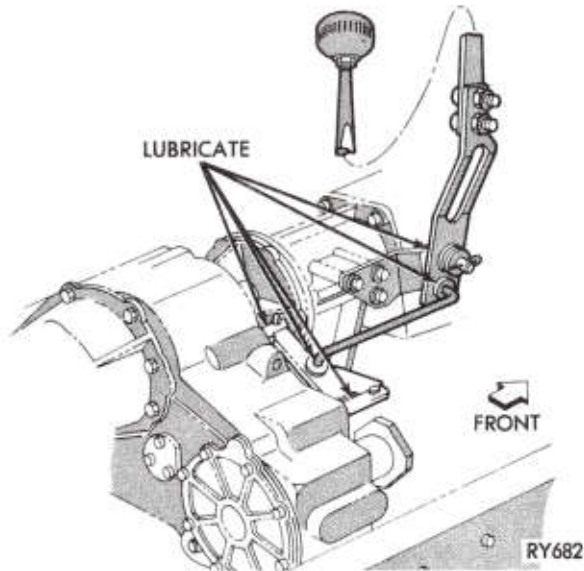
Gearshift Mechanism Lubrication (NP205 Transfer Case)
